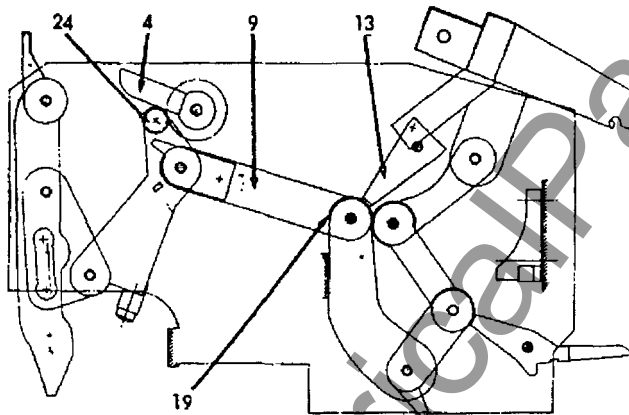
Driving cranks (4), turning counter-clockwise, have gone overcenter throwing links (9) into compression with latch roll (19) against closing latch (13). If latch (13) does not pick up the load, link (9) will move forward allowing roll (24) to go around driving crank (4) to position as shown in figure 2.
